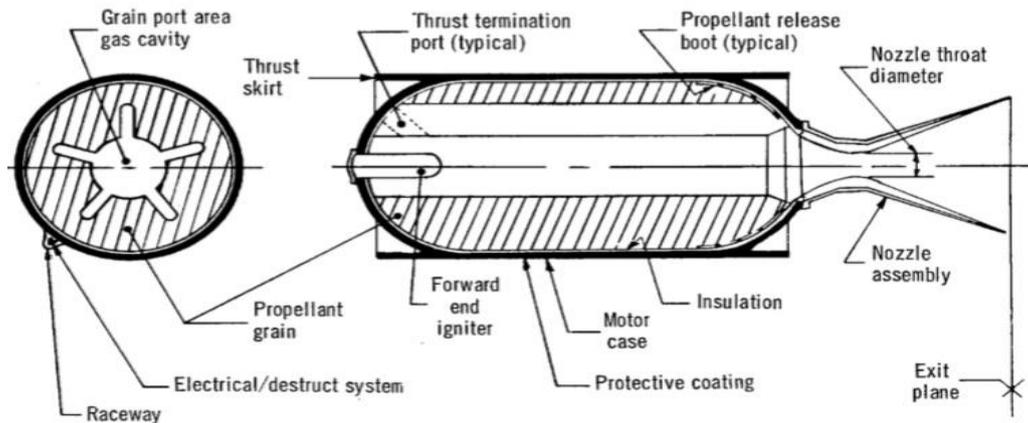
Components of Solid Rocket Rocket Motor (SRM)
